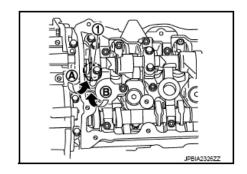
Measuring Cylinder Intake Valve Clearances Using Feeler Gauge
